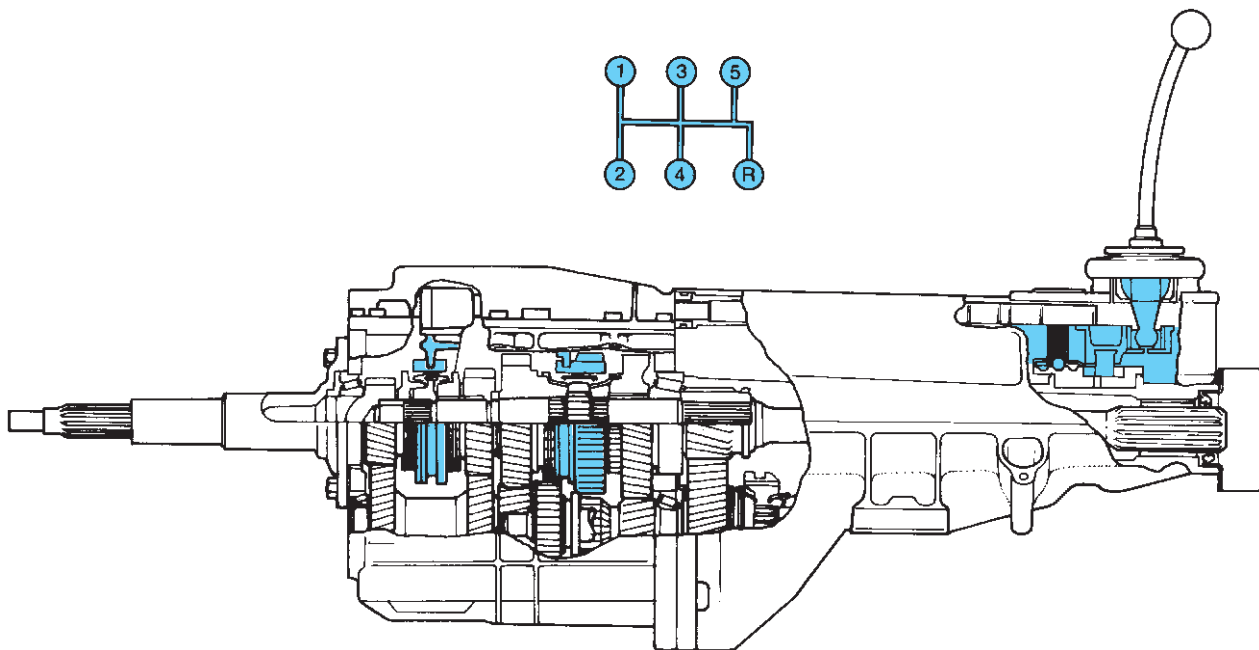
When the gearshift lever is moved, the internal linkage (shift rails) moves the shift fork and synchronizer sleeve to shift gear speeds. (Courtesy of BWD Automotive Corporation)
